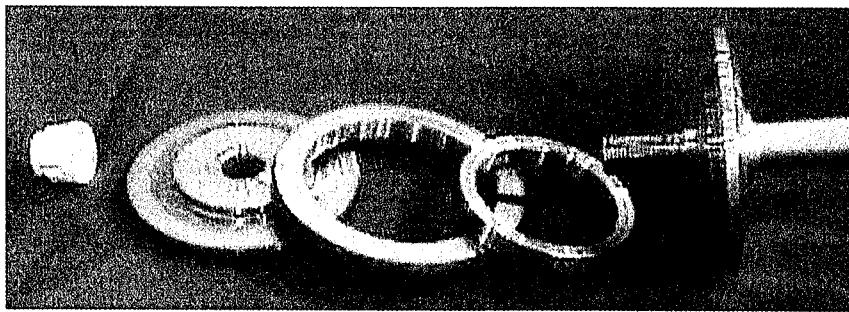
Piston Assembly Damper Rod w/Rings and Plates
